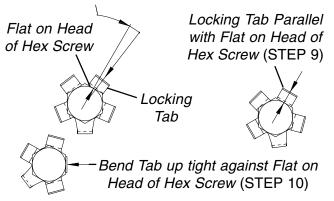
INSTALLING/REPLACING REAR WHEELS
